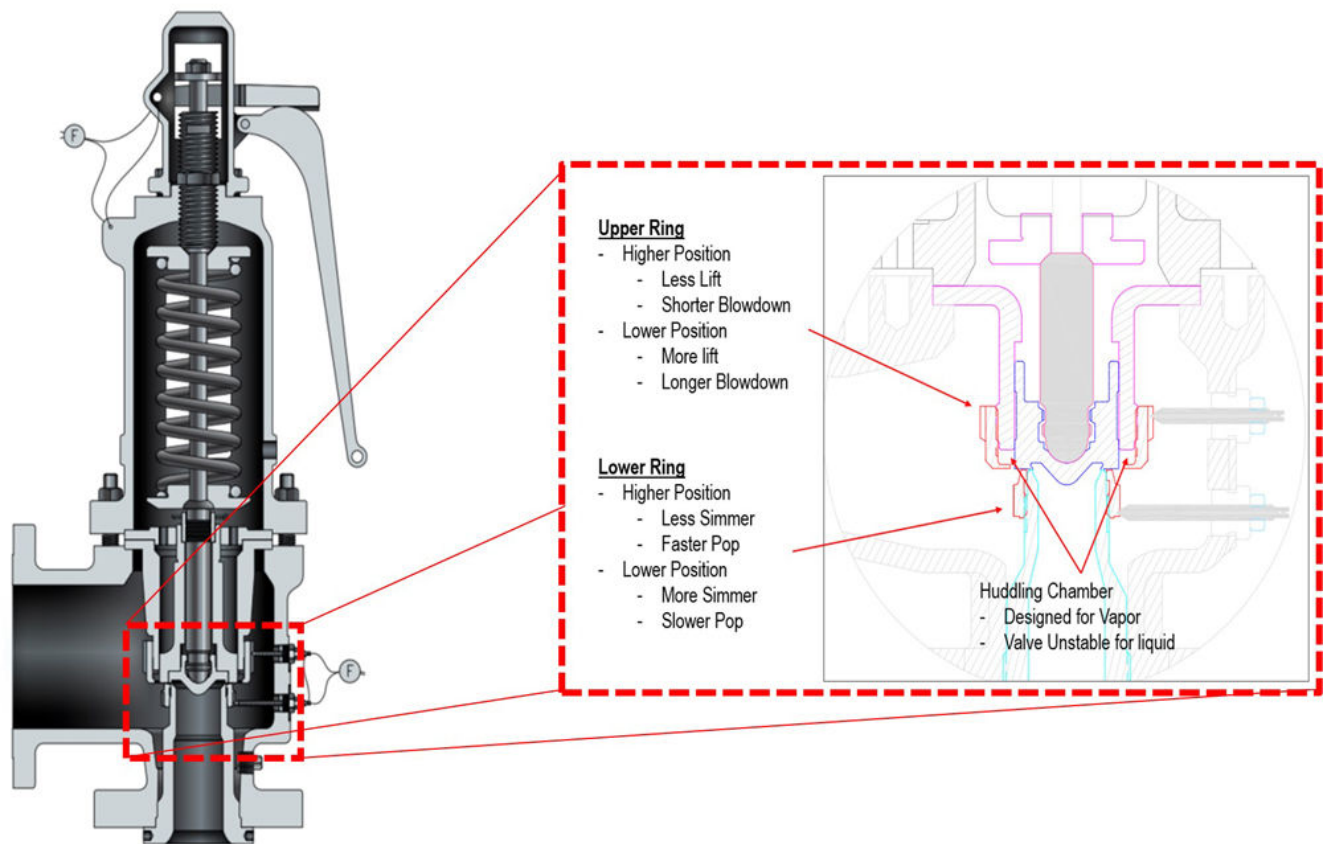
A cutaway view of a dual-blowdown ring safety valve showing details of the upper and lower blowdown rings.
